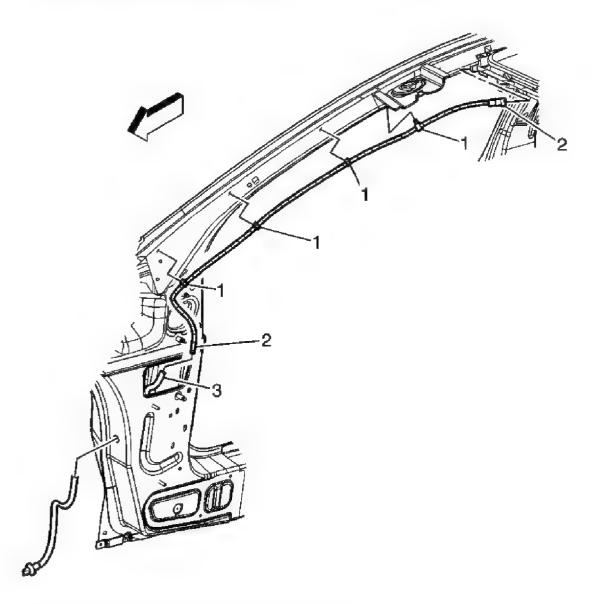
Identifying Sunroof Housing Front Drain Hose Courtesy of GENERAL MOTORS CORP.
